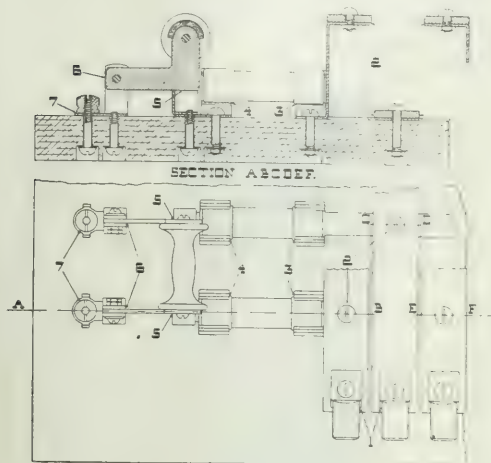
DETAILS OF THREE WIRE PANEL.
